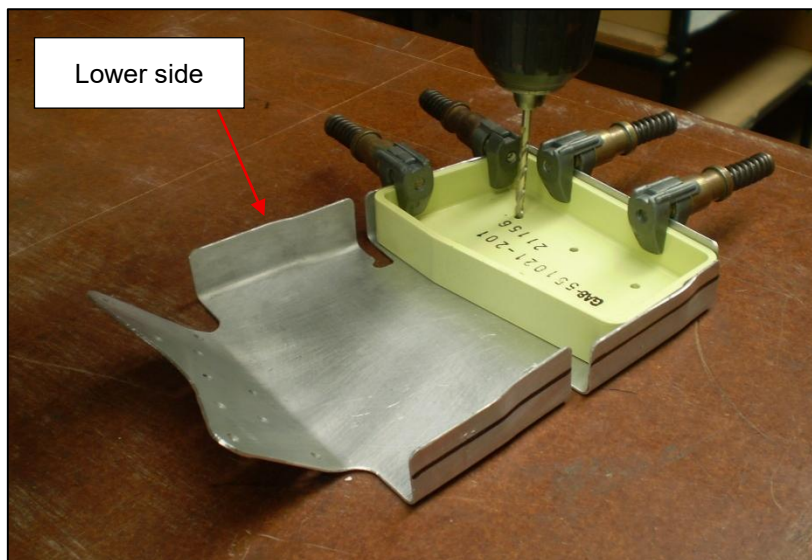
Typical Installation of Stiffener Brackets to Rib Sections
